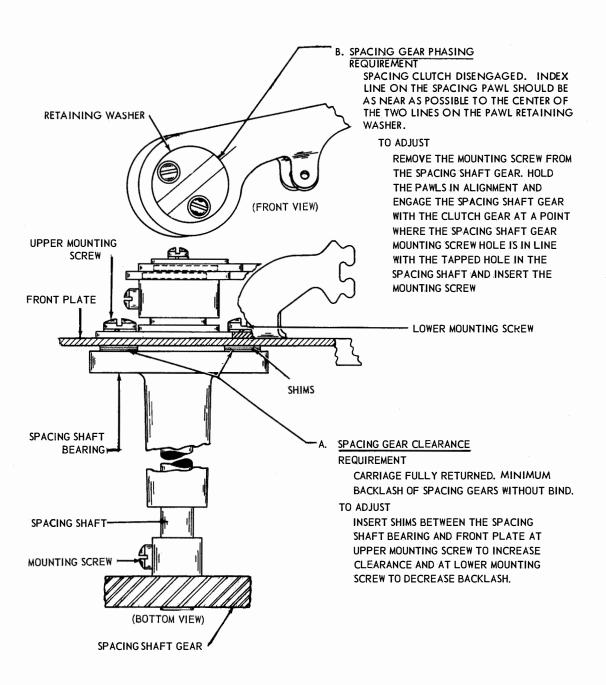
TYPING UNIT, SPACING MECHANISM
